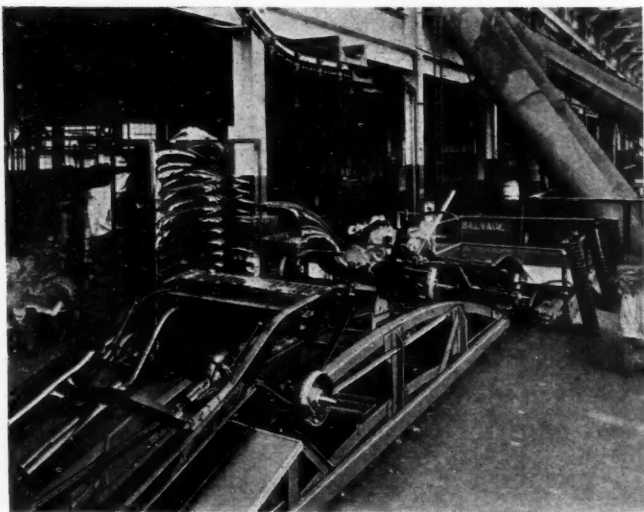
On the mezzanine floor shown, all sheet metal parts are completely finished. On the hump in the conveyor line all sheet metal parts are installed in the Oakland factory ++
